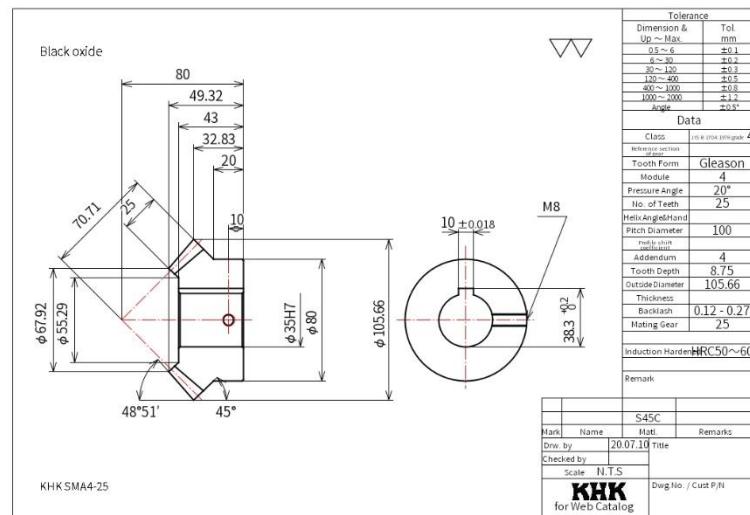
Miter Gears KHK SMA4 25 [17].
